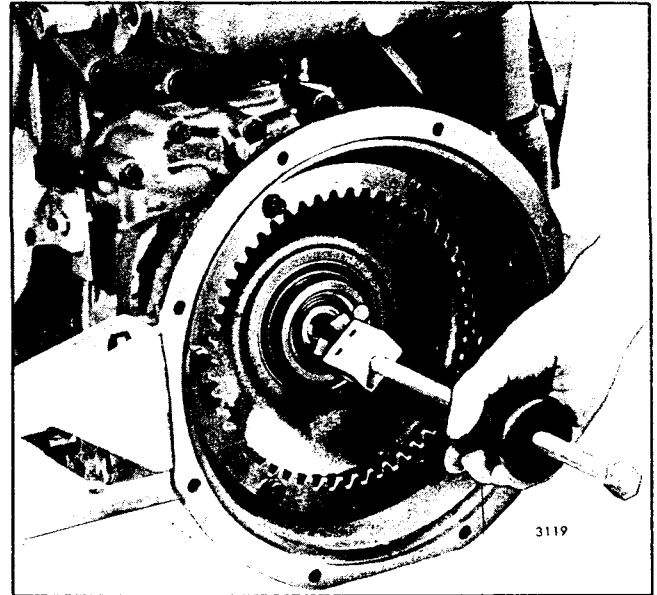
Removing Clutch Drive Shaft Pilot Bearing From Clutch Drive Adaptor
